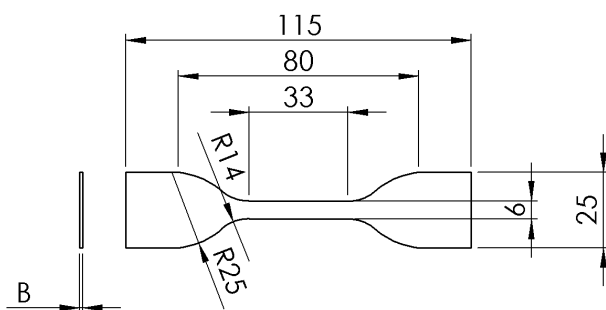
Type 5 dumb-bell specimen geometry. *B* is the nominal thickness (1 mm for compression moulded samples and 0.5 mm for bottle samples).
